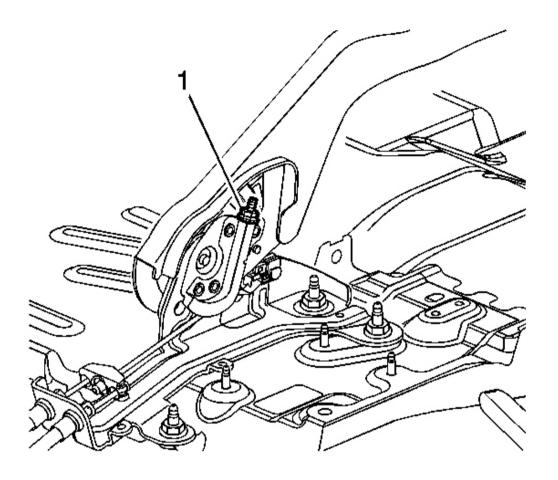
Loosening Adjusting Nut (1) Completely To The End Of Front Cable Threaded Rod Courtesy of GENERAL MOTORS CORP.
